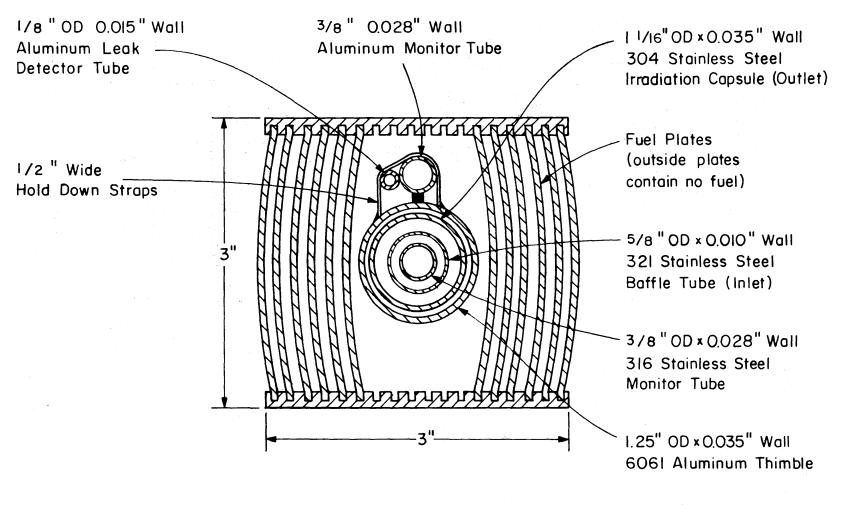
DRAWING OF FUEL ELEMENT CROSS SECTION WITH POSITION OF IN-PILE SECTION SHOWN
